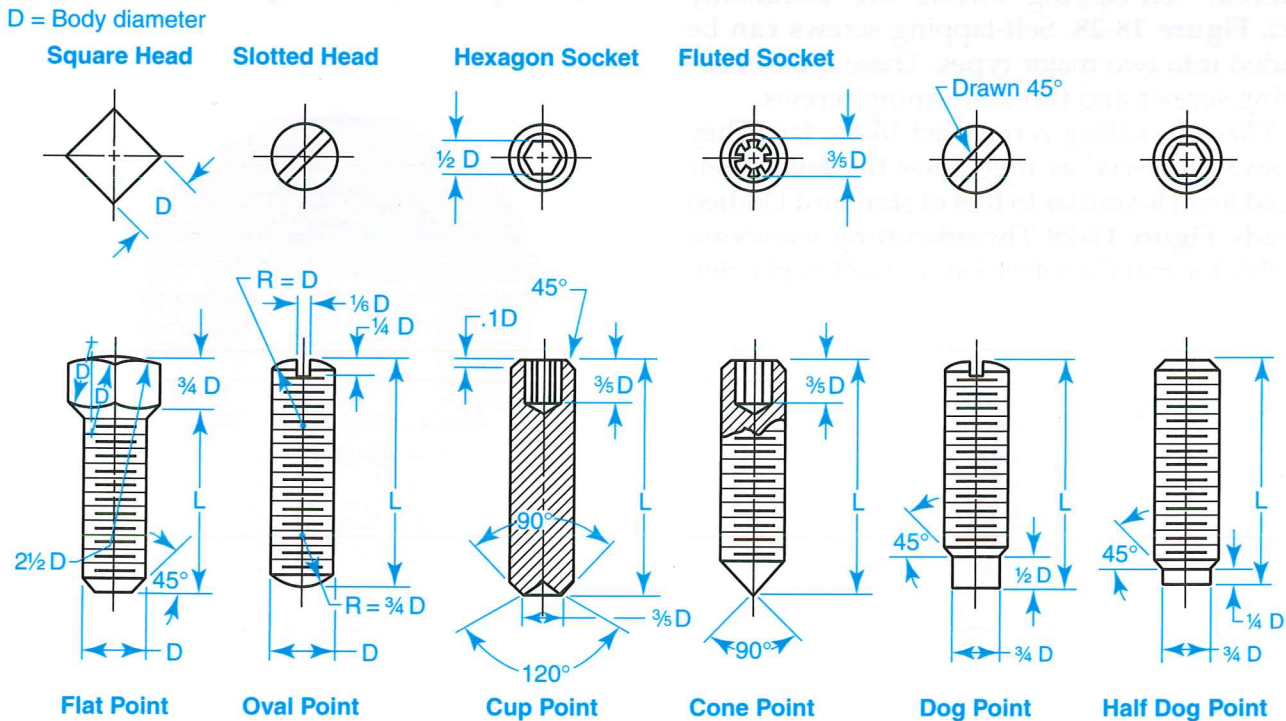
Drawing conventions for standard setscrews. Approximate dimensions are shown.
